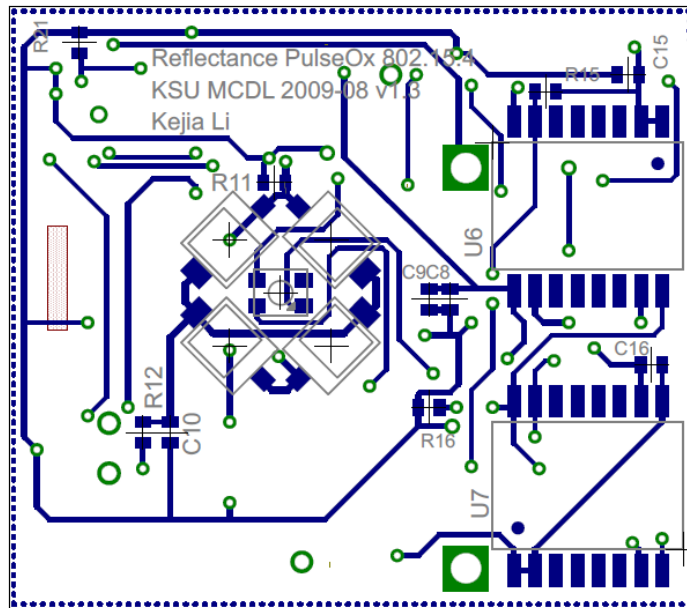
Pulse oximeter version 2 PCB (bottom view).
